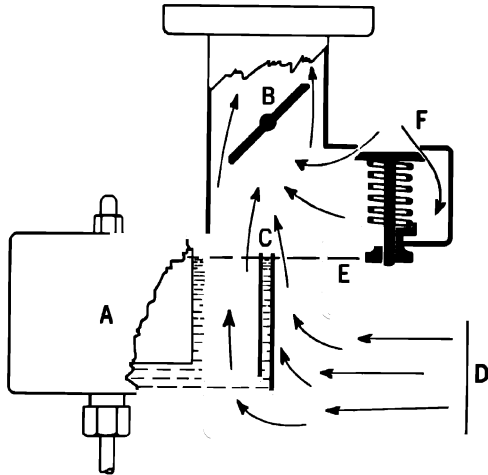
Addition of an Auxiliary Air Valve to a Simple Type Carburetor
